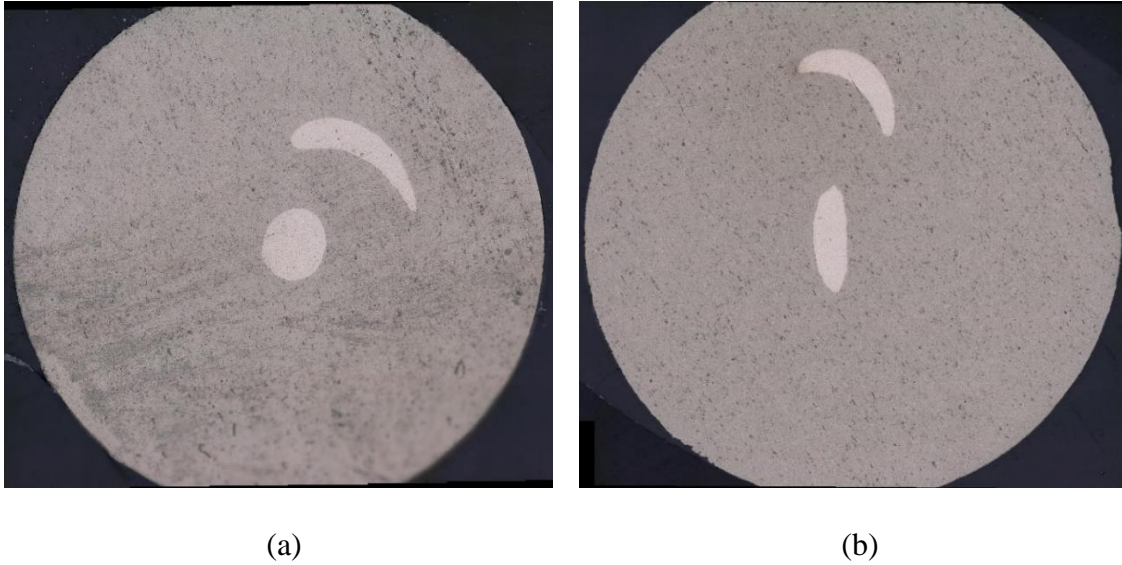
Cross sections from extrusions performed at 150 rpm and 40 mm/min. (a) flat die extrusion. (b) scroll die extrusion
